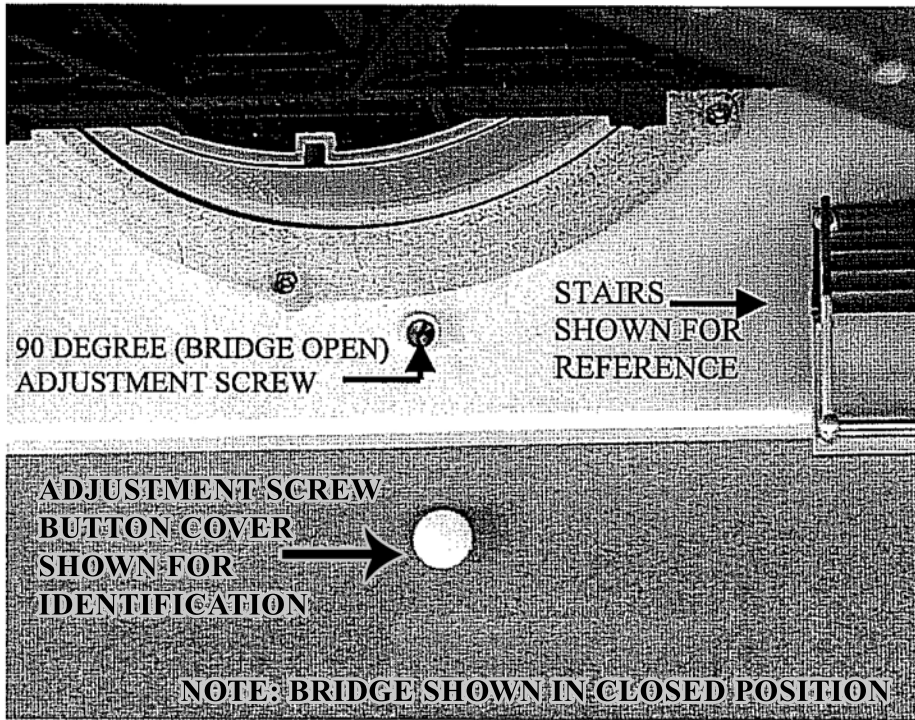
90 DEGREE (BRIDGE OPEN) ADJUSTMENT SCREW LOCATION
